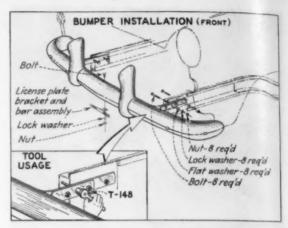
A complete bumper assembly for a car is presented in this compact, easy-to-read perspective view.
